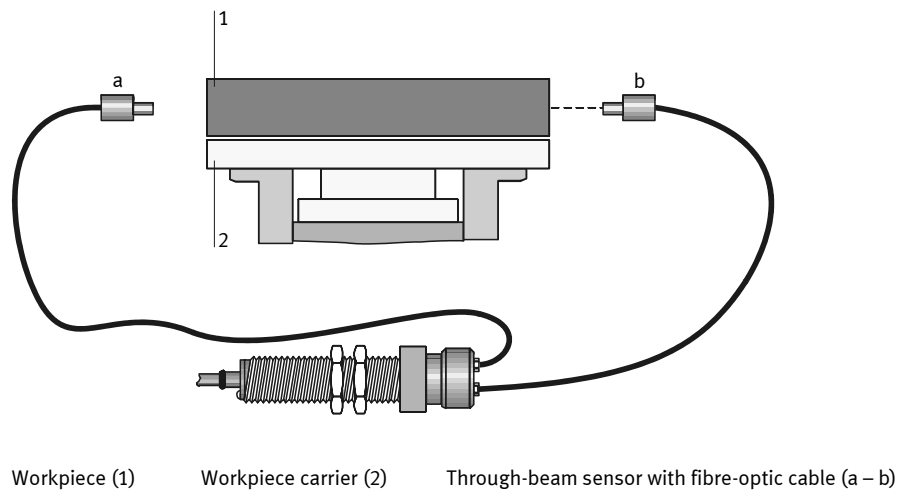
Detection of workpieces on a workpiece carrier
